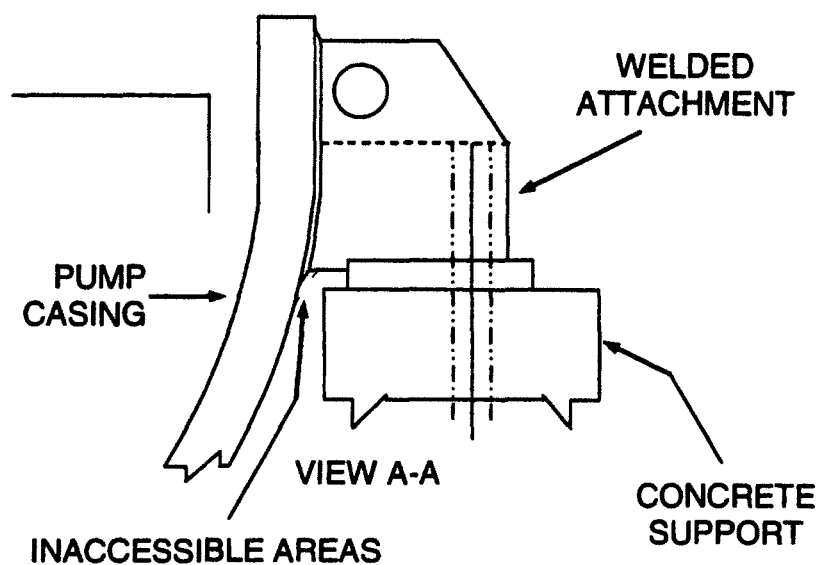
CS and RH Pump Attachment Welds
